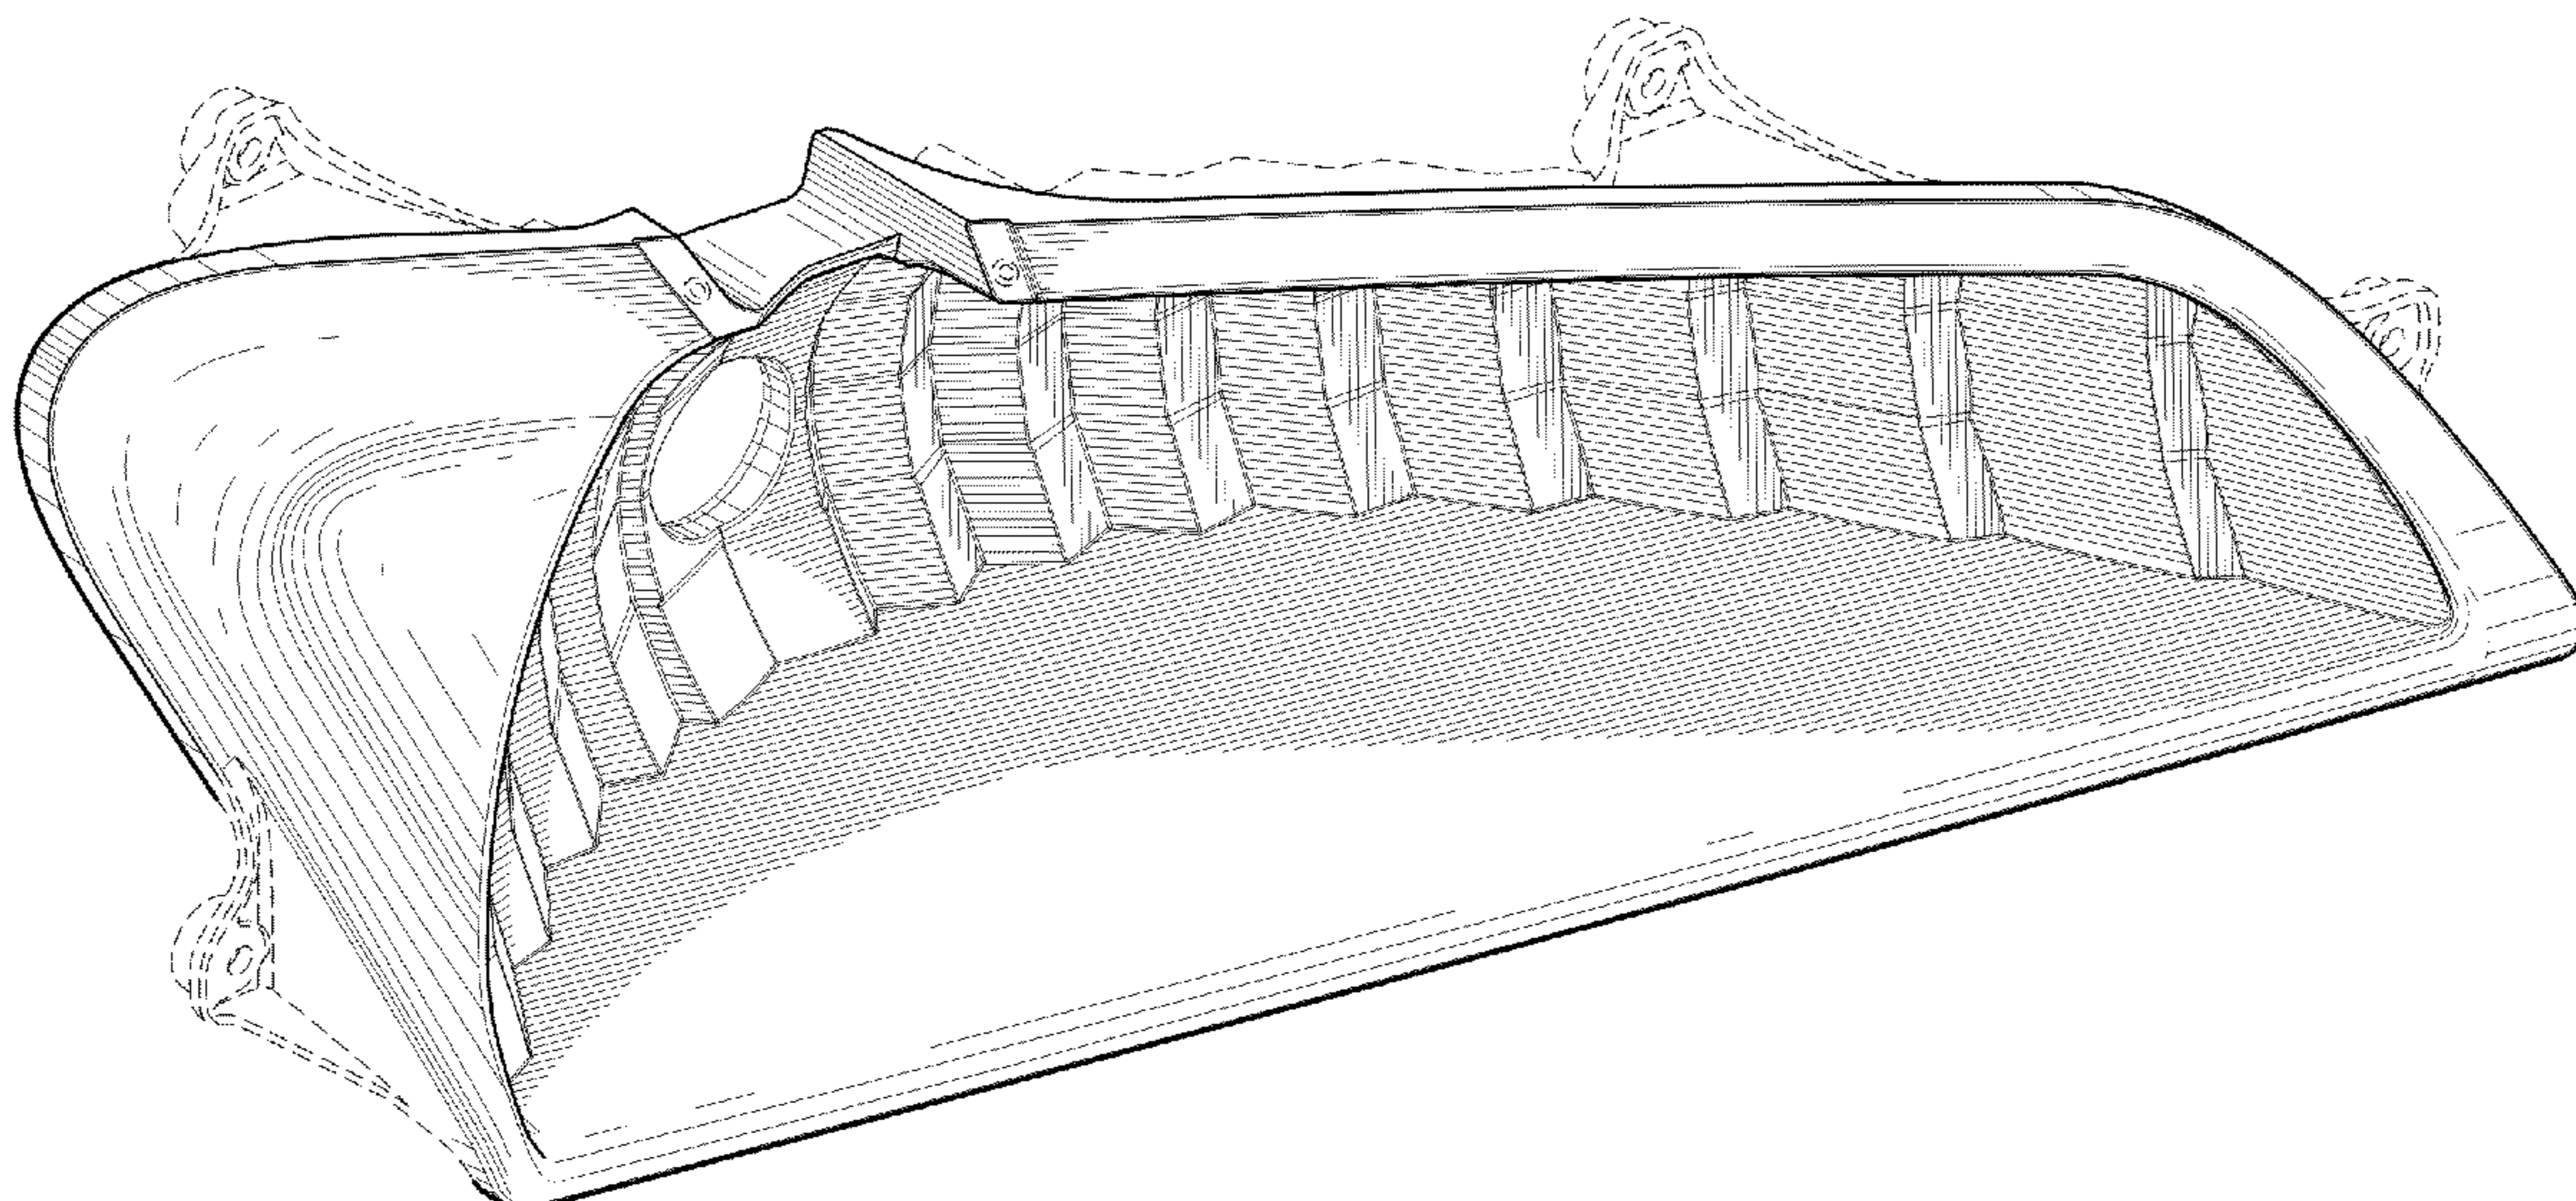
is a front perspective view of a headlamp direction indicator reflector according to our new design; FIG. 2 is a front elevational view of the headlamp direction indicator reflector of FIG. 1; FIG. 3 is a top plan view of the headlamp direction indicator reflector of FIG. 1; and, FIG. 4 is a right side view of the headlamp direction indicator reflector of FIG. 1.
